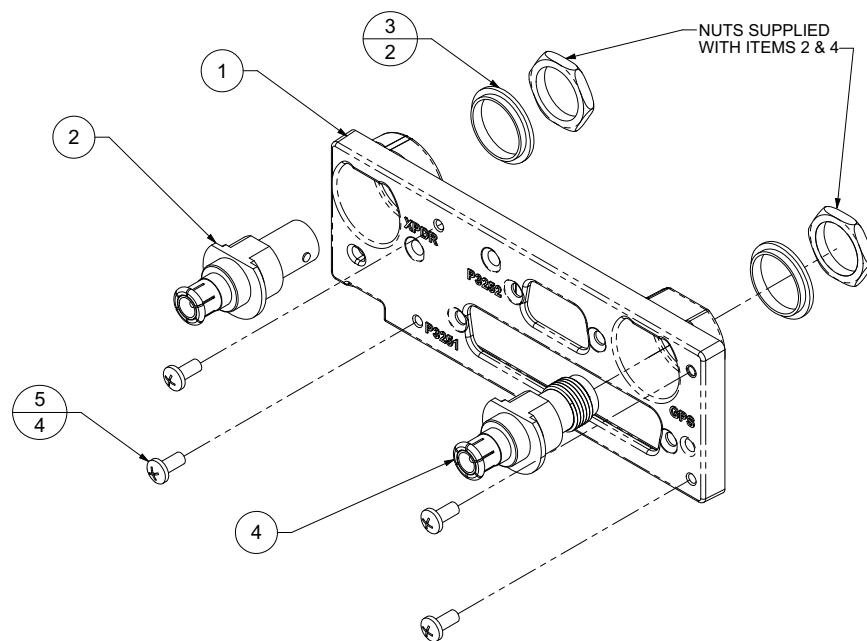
GTX 3X5 with GPS Back Plate Assembly (P/N 011-02976-01)
